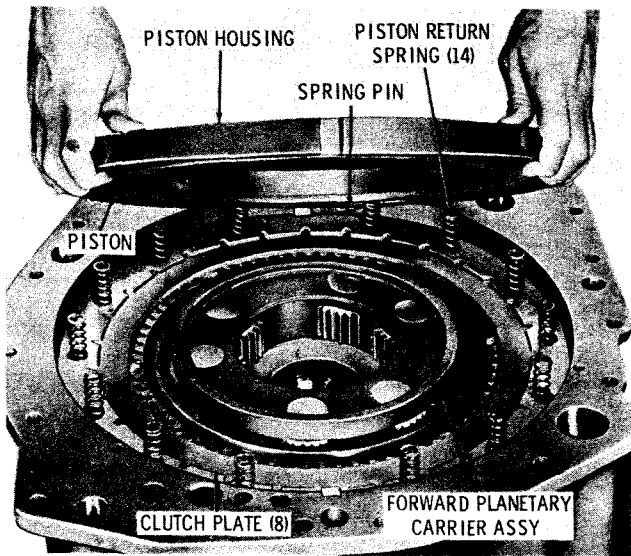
Removing forward clutch piston housing (5631 models)
